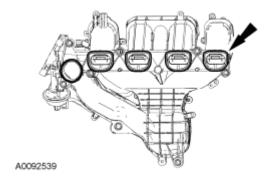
Locating Intake Manifold Gaskets Courtesy of FORD MOTOR CO.
